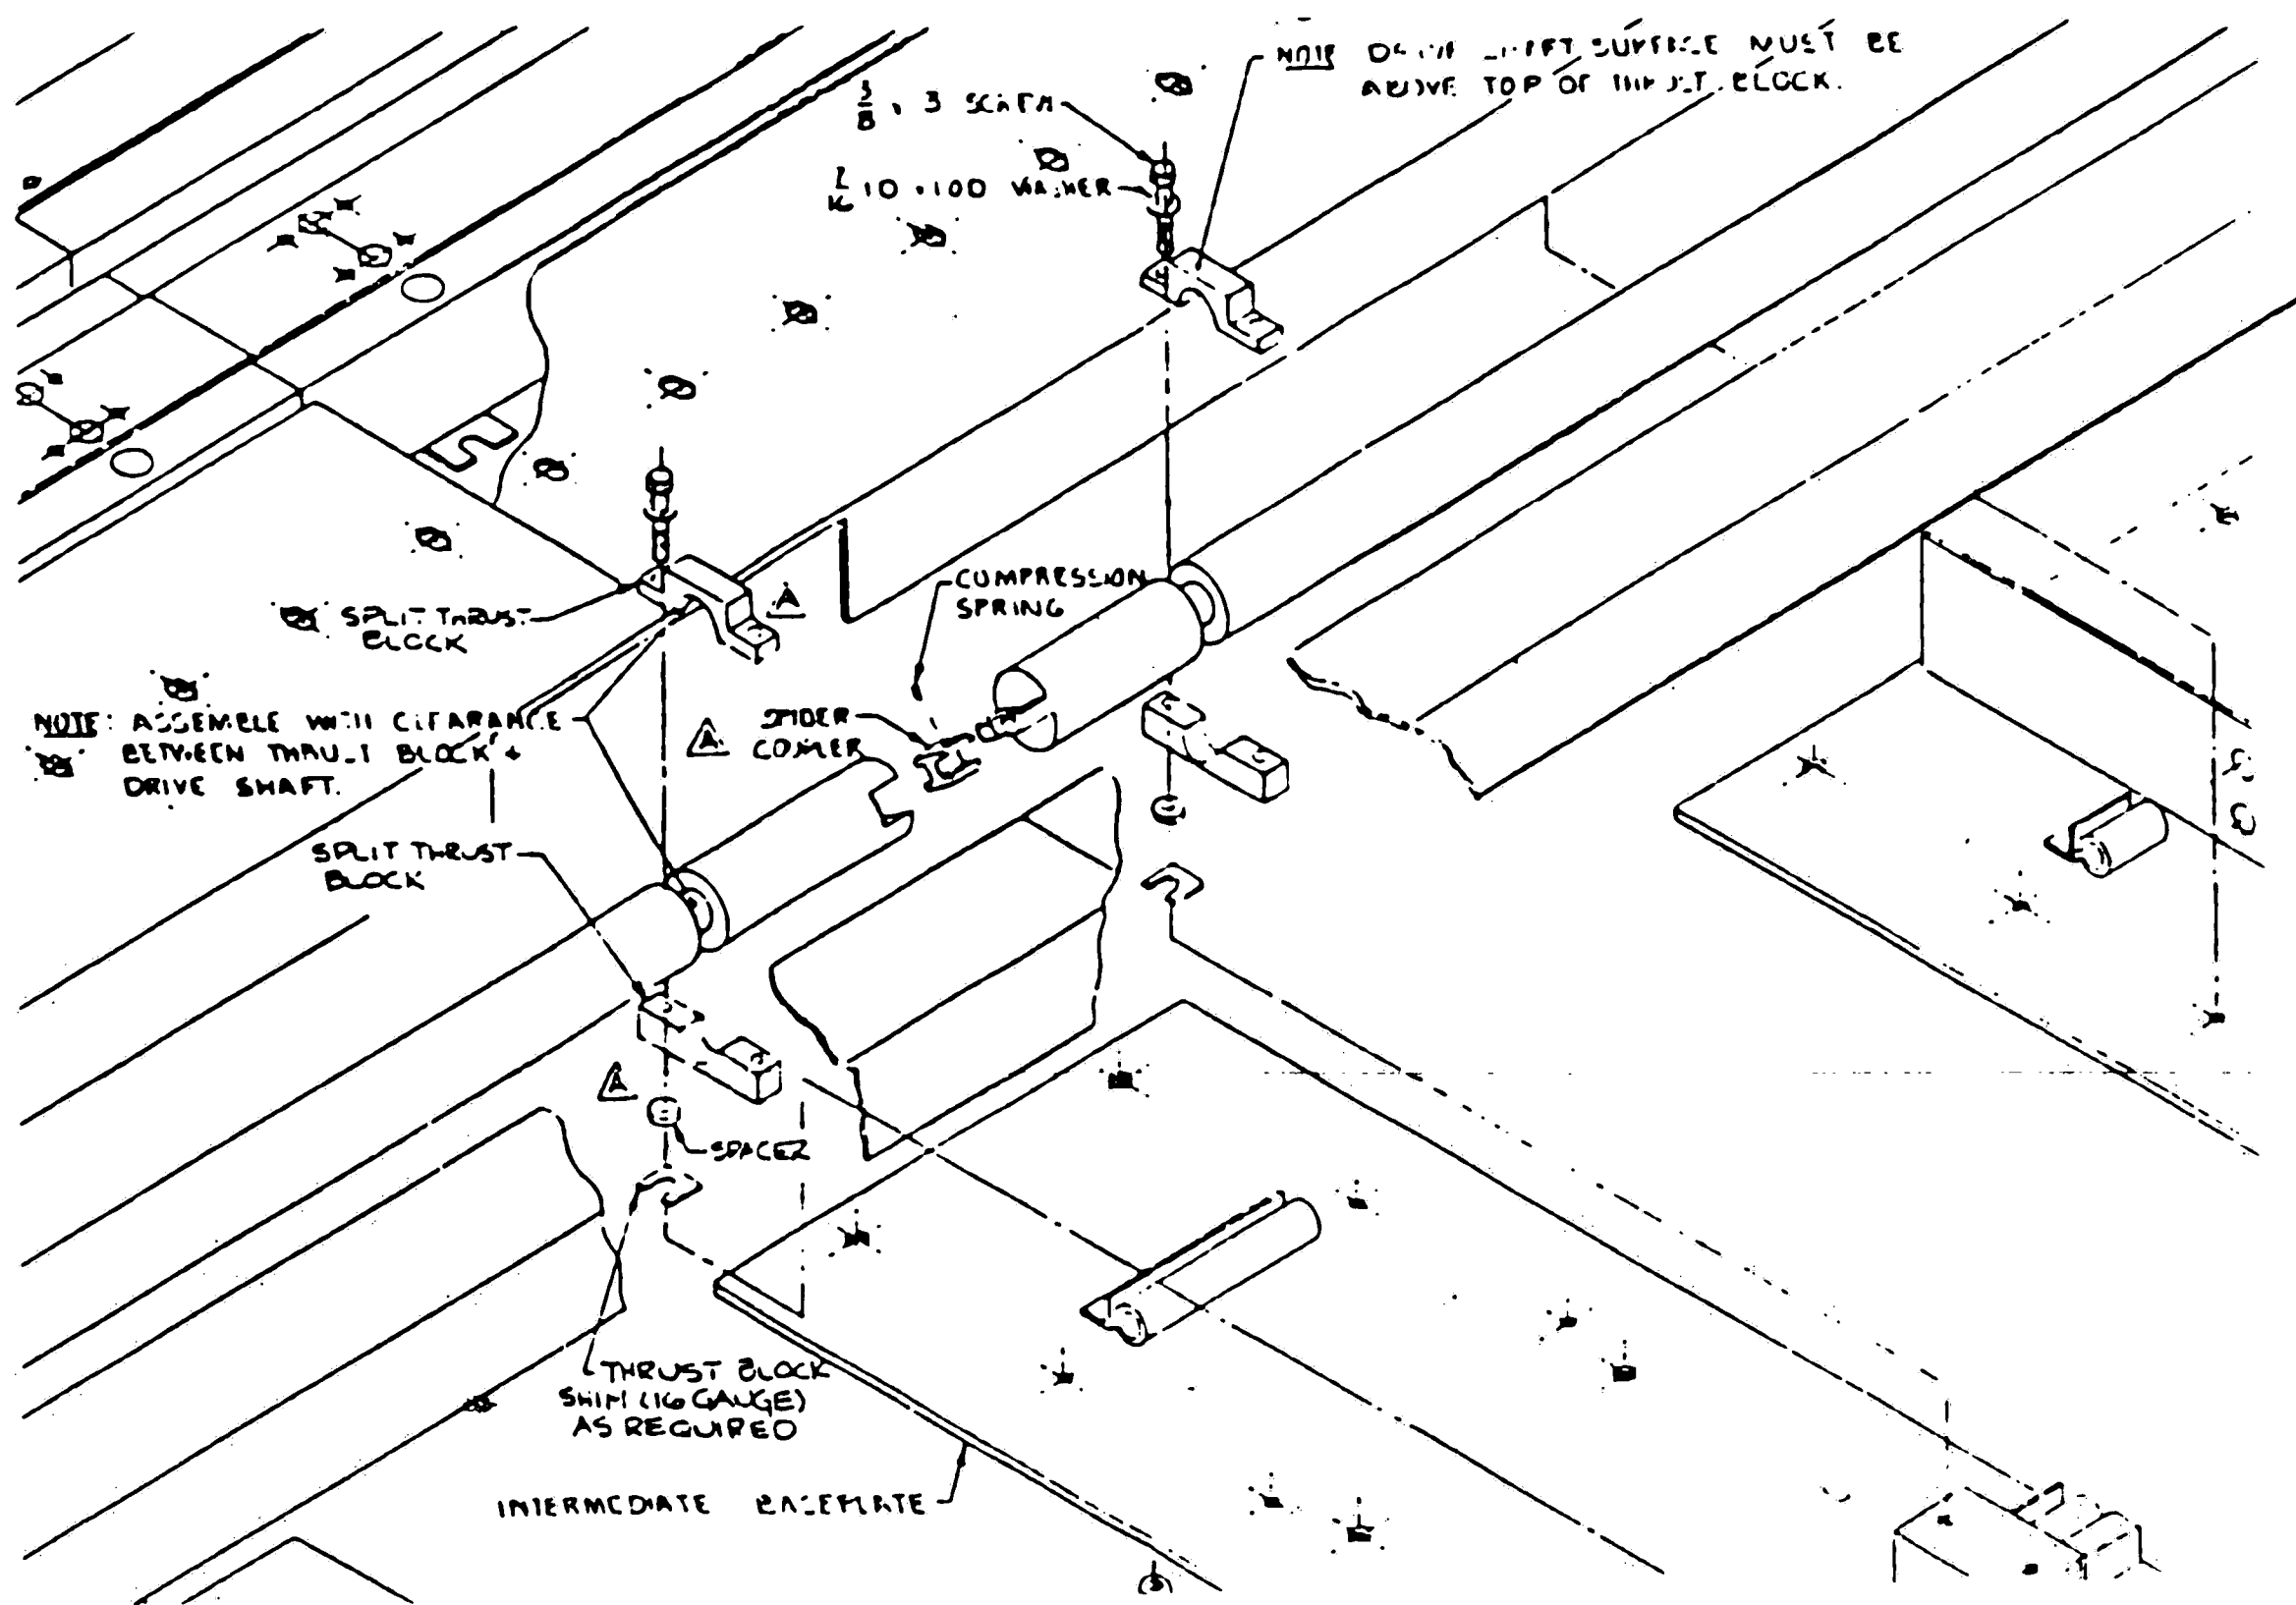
Drive tube, coupler, thrust block, and track joint [11].
